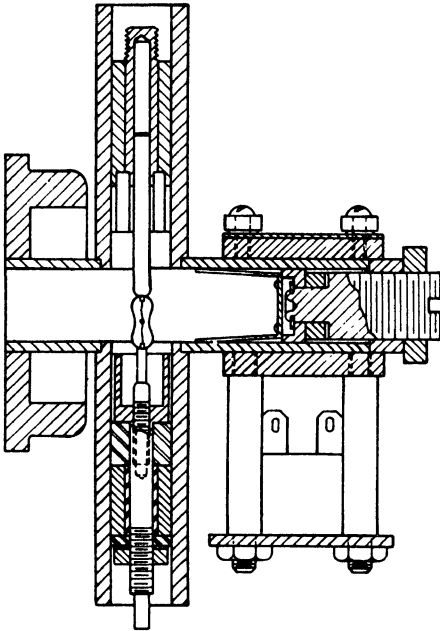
Drawing of the tri-tuner 3-cm-band thermistor mount.
